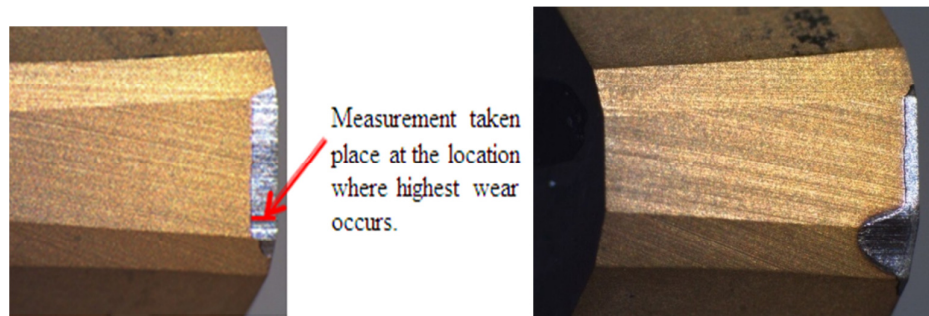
Coated carbide tool inserts wear and tool damage to be viewed under a microscope
